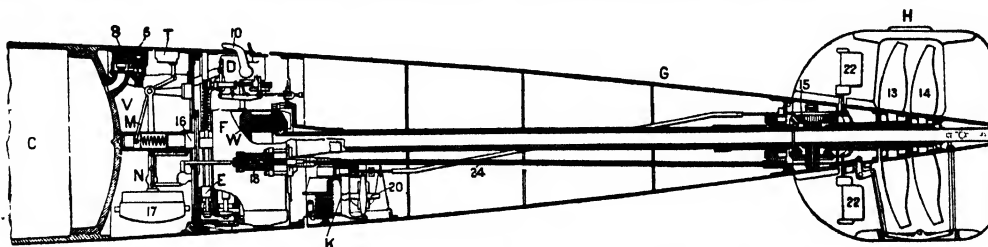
PROPELLING AND STEERING MECHANISM OF WHITEHEAD TORPEDO.
